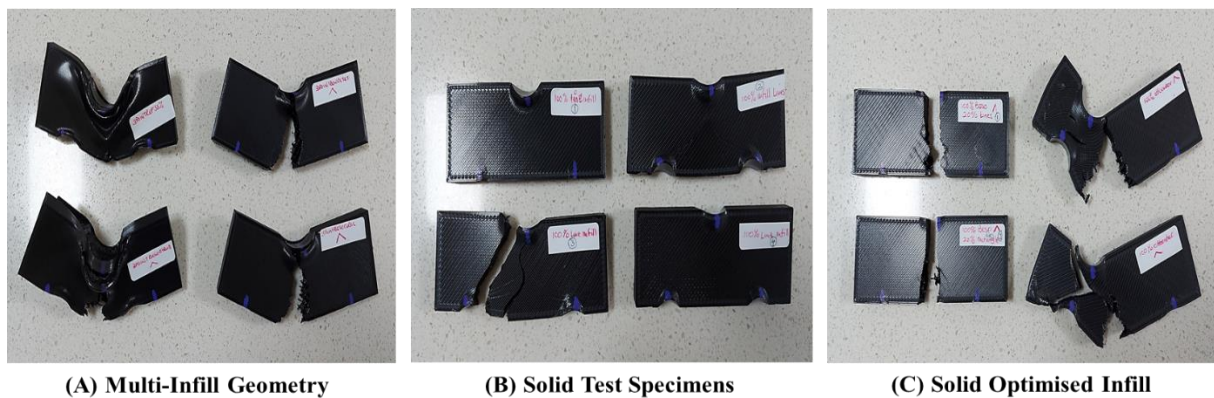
15 Bottom Surface Defect on Test Specimens
